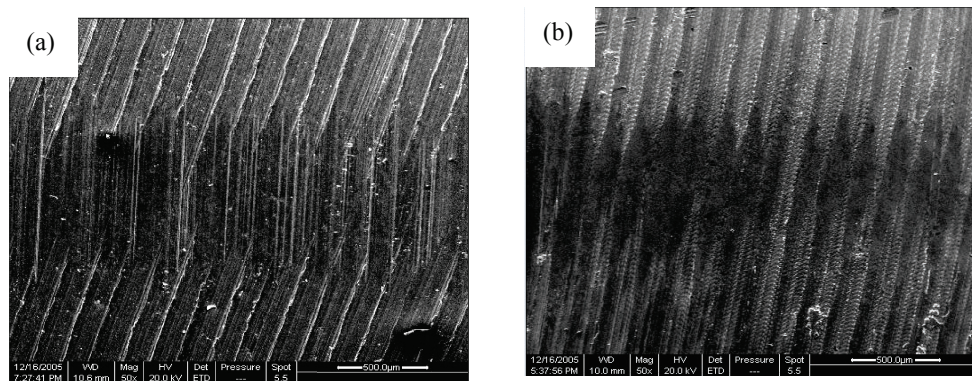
SEM images of worn surfaces of the machining part: (a) 650SN; (b) 650SN with n-Cu
